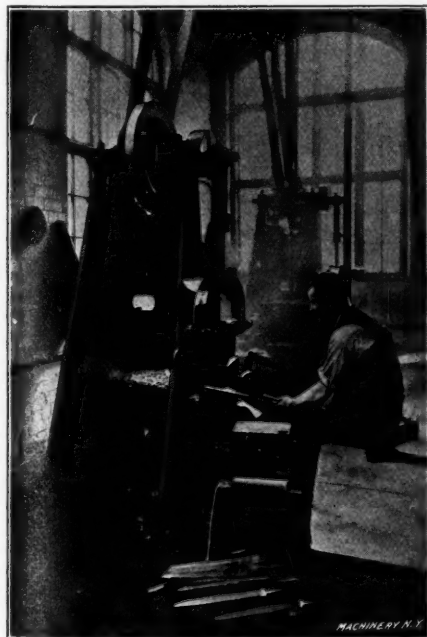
Forging the Blanks by Quick-action Power Hammers superseding the Old Hand Method
